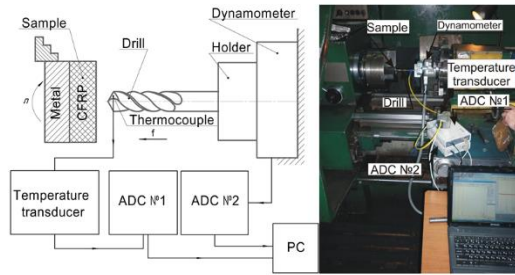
Drilling Experimental Set Up at CMC Lathe Machine 16B16TI
